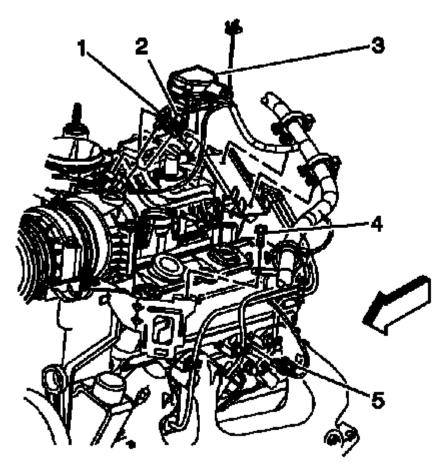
View Of TP Sensor, IAC Motor, ECT Sensor, Control Port Injector Module & Engine Harness Clip Bolt Courtesy of GENERAL MOTORS CORP.
